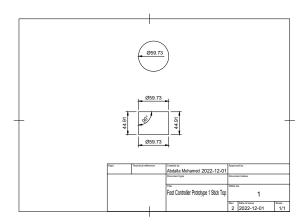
Foot Controller Prototype 1 Top Stick Technical Drawing
